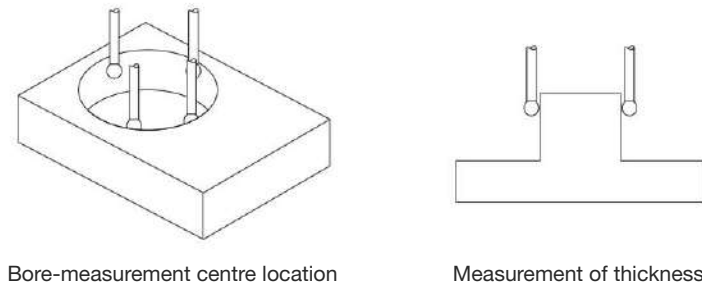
Probing examples: (a) Inspection of a bore for diameter and centre position, (b) Inspection of a web thickness
